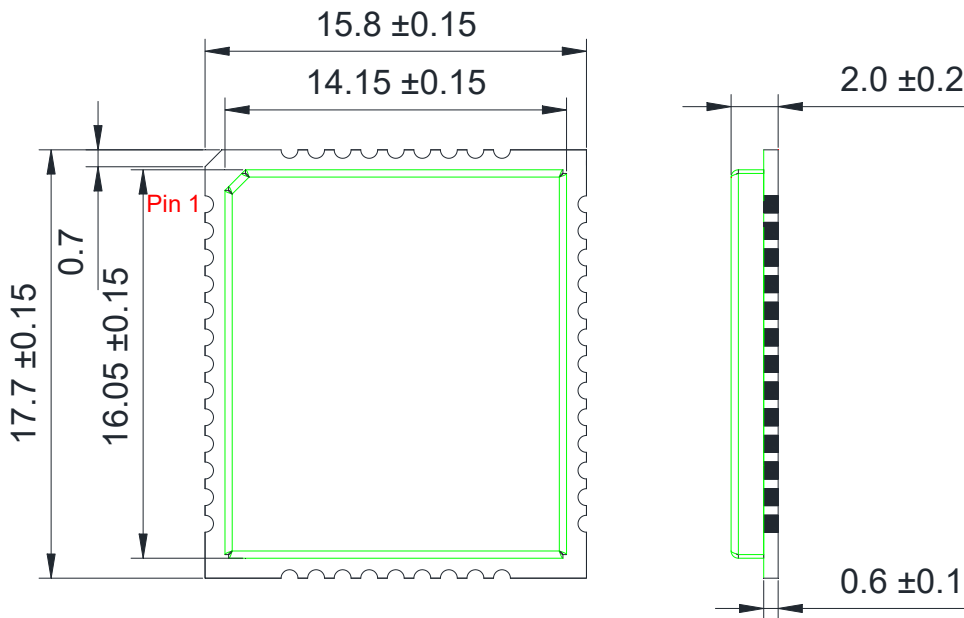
BC660K-GL Top and Side Dimensions (Unit: mm)
